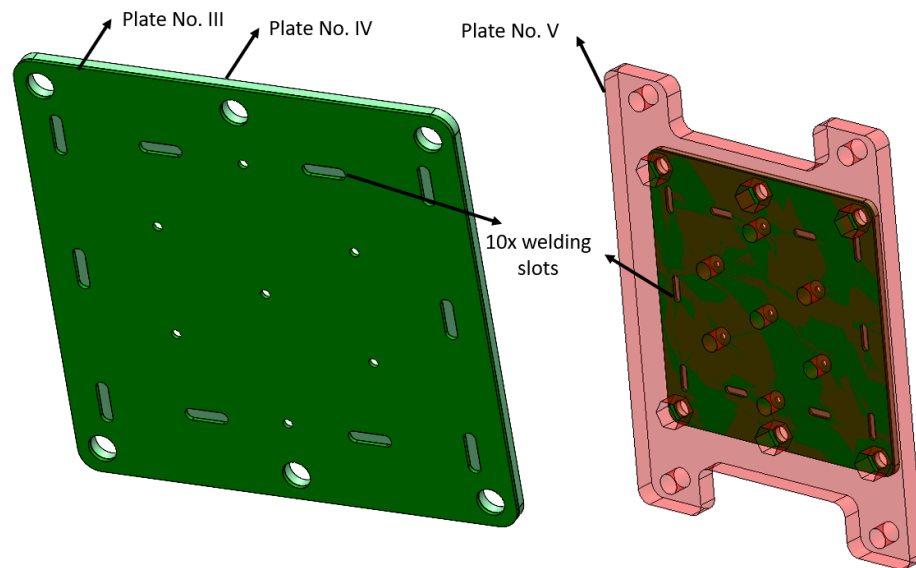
The digital twin of the die-holding assembly plates with welding slots.
